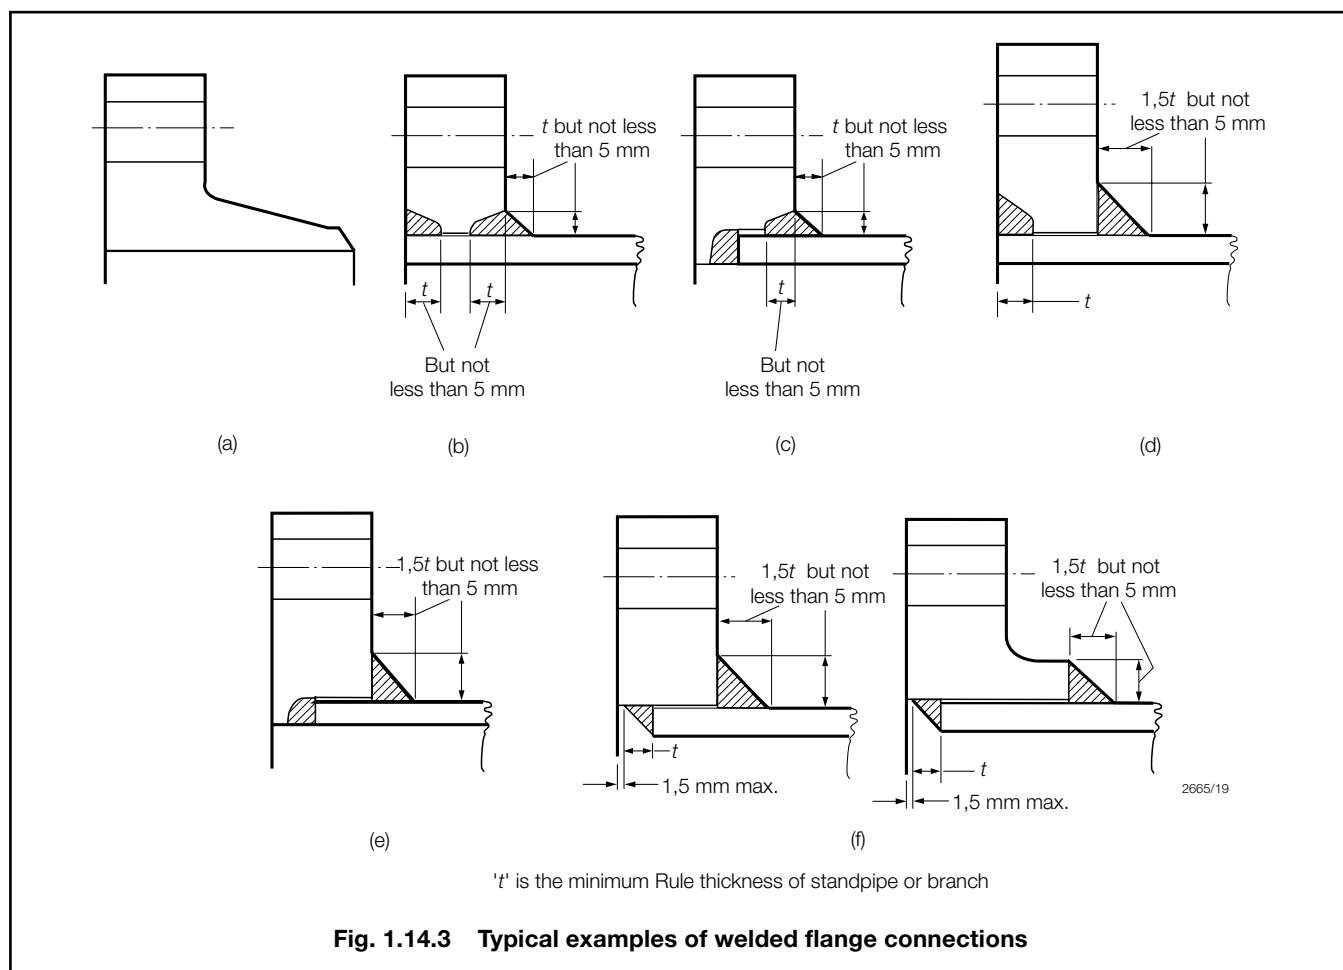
Typical examples of welded flange connections
